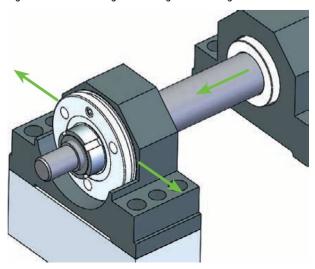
Ballscrew at the left stop for aligning the fixed bearing
